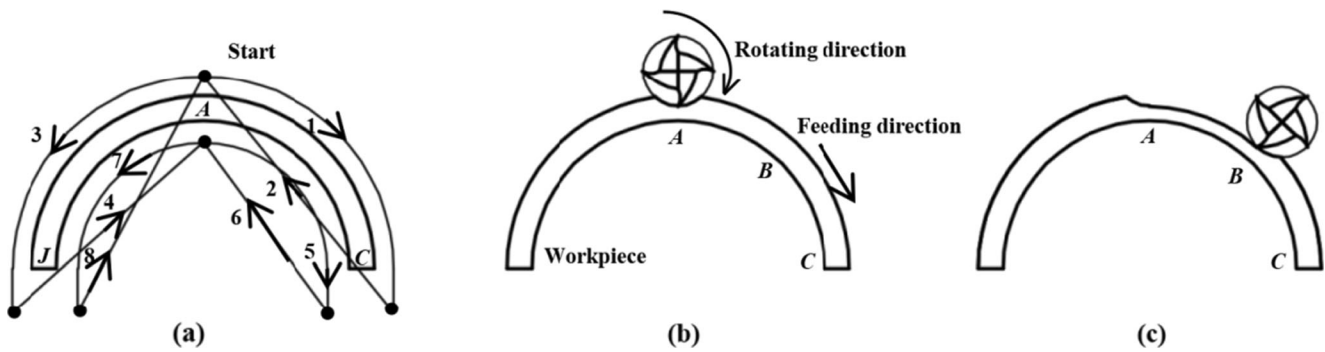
Machining from high rigidity to low rigidity: a tool path, b start position, c machining direction
